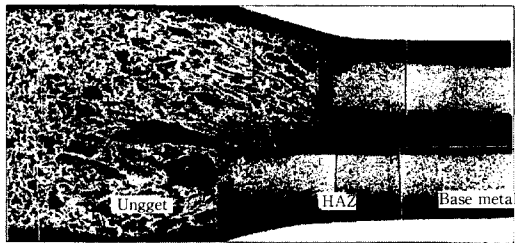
Cross section of CO<sub>2</sub> plug welding zone ( $\times 25$ ).
